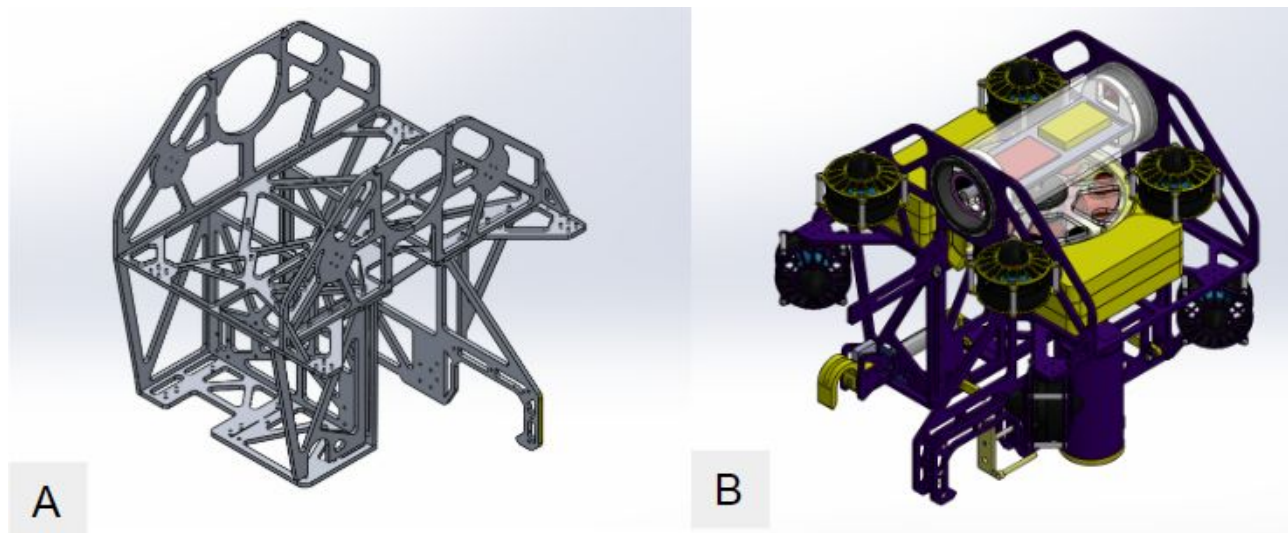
Final frame CAD (A) and complete assembly CAD (B).
